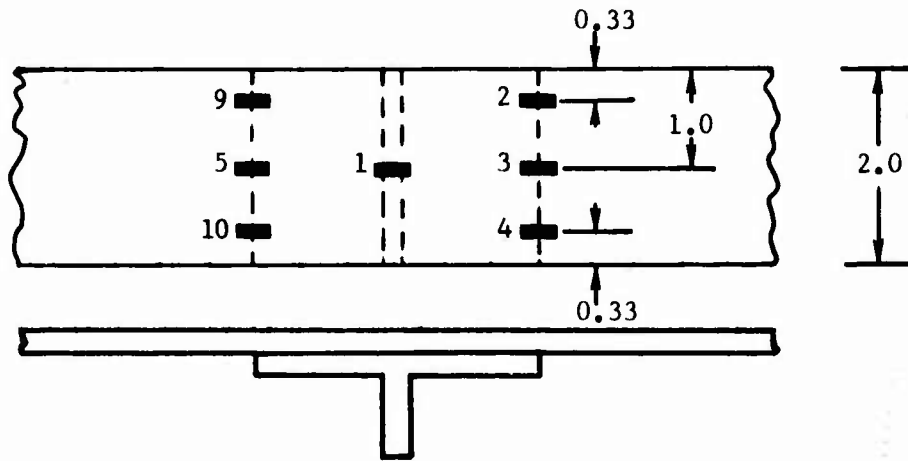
Strain Gage Locations for Shaker Test Specimens with Tee Section Stiffeners
